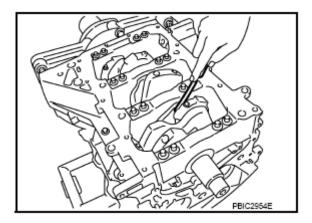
Measuring Side Clearance Between Connecting Rod And Crankshaft Arm Using Feeler Gauge
